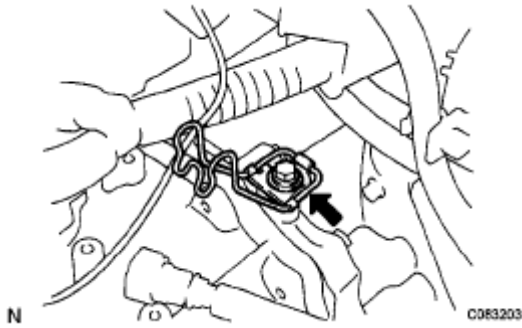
Locating Transmission Control Cable Clamp Bolt
